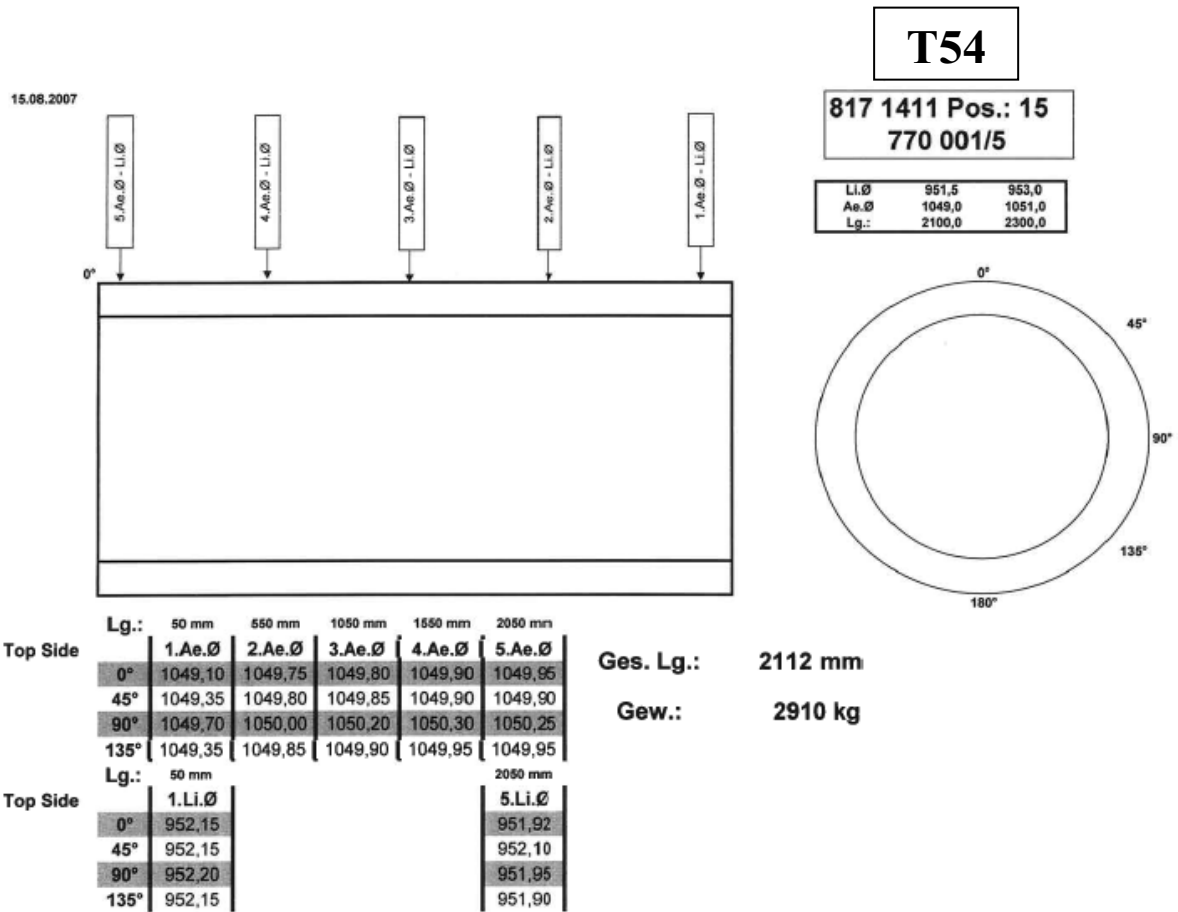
The dimensional control results of the top part of the T54 cylinder after machining.
